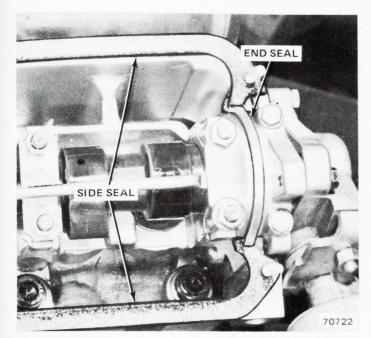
B-33 Cylinder Head Cover Gasket Installation
